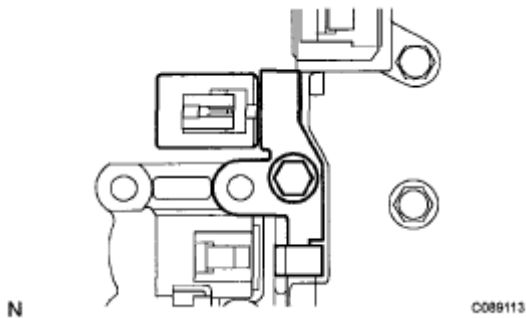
Identifying Shift Solenoid Valve SL2 Bolt
